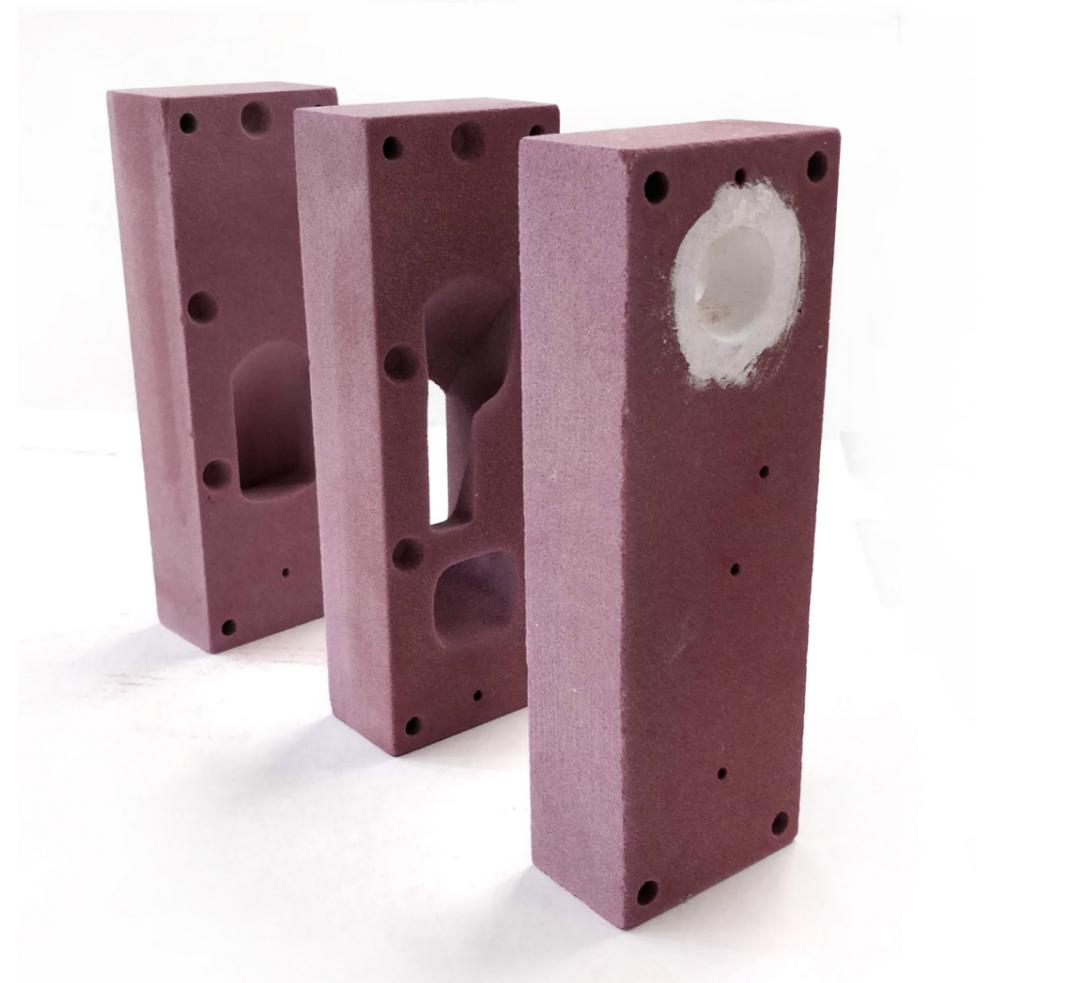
s: 3D printed mould at 1:3 scale for prototyping
